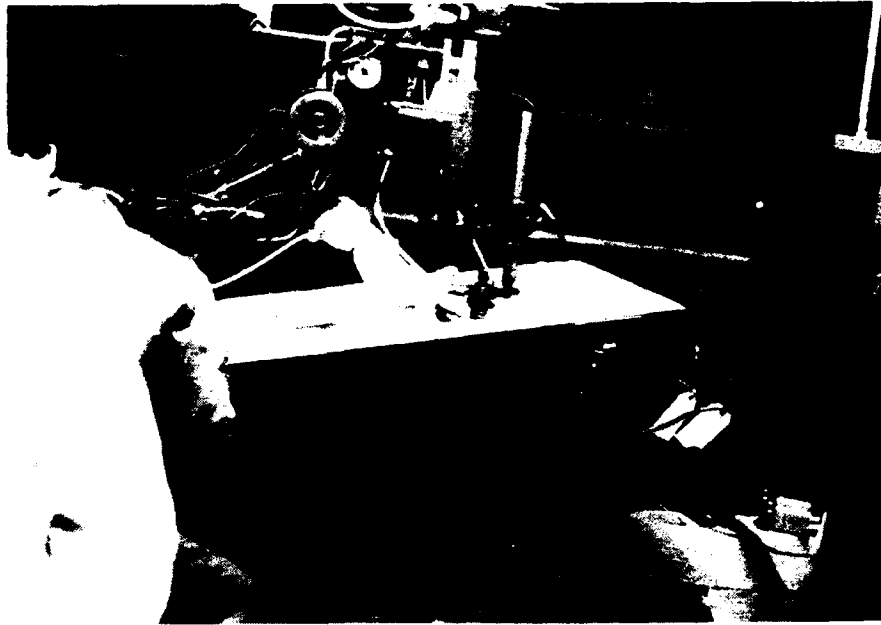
Equipment setup used for weld repair of hammers.
